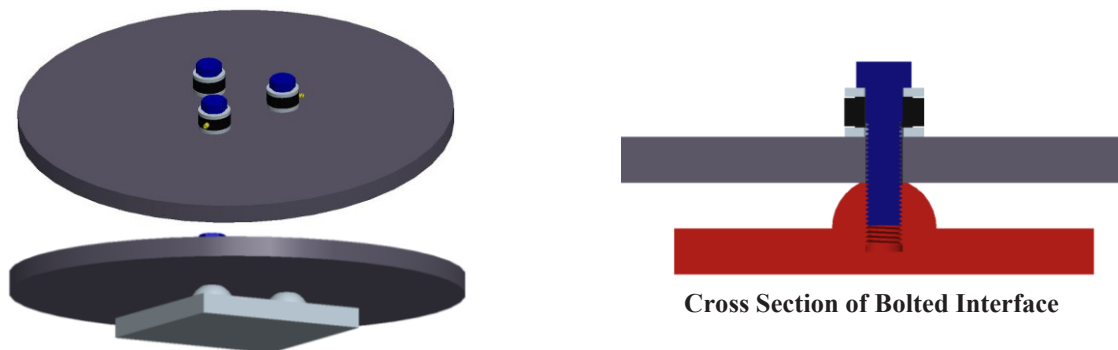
Bolted Interface Test Fixture Used for Experiment
